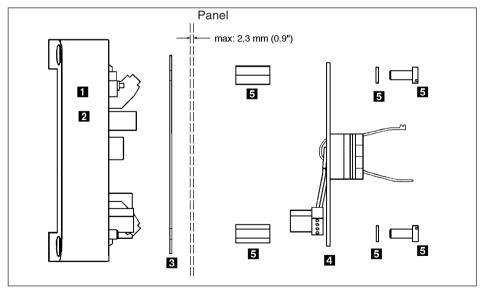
Spare parts explosion drawing pH controller type 8205 panel version
